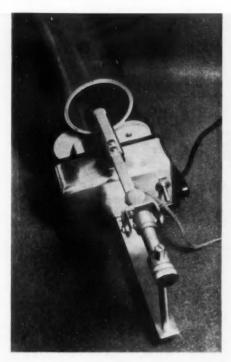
How circumferential trace is made mechanically in measuring inside surface finish of tubing.
